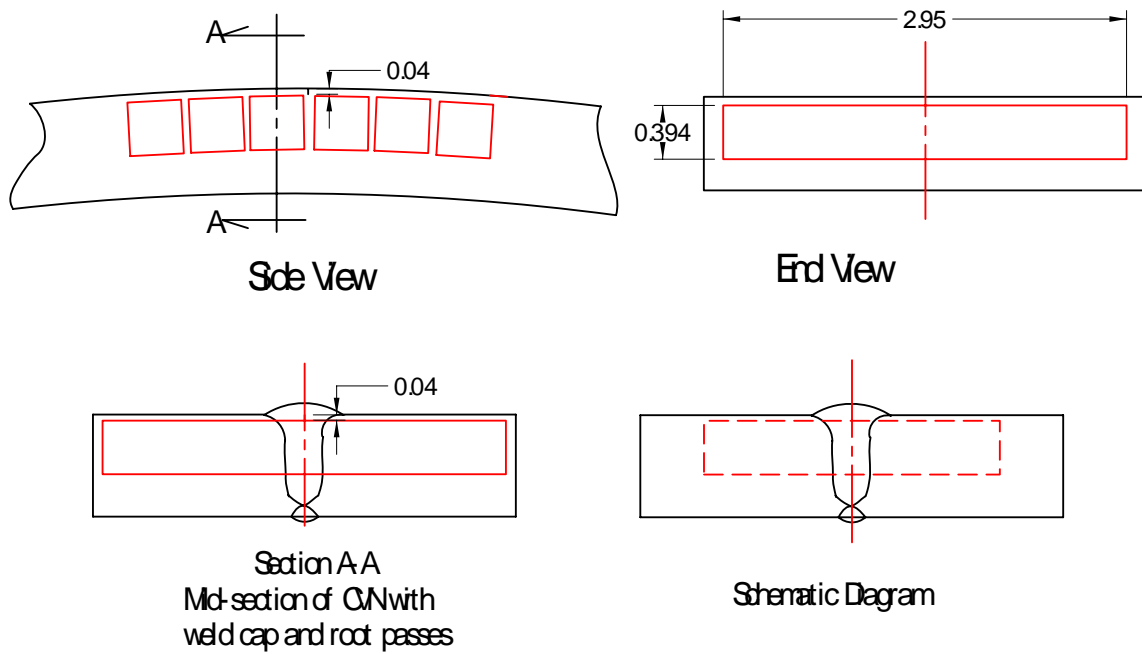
Schematic Showing Weld Cross-sections and Locations of Charpy V-Notch Specimens
